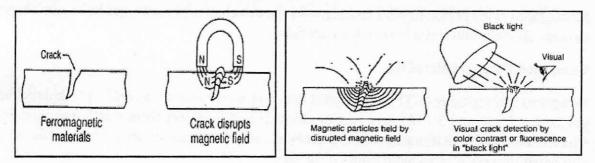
Principle of Magnetic Particle Inspection (MPI)
